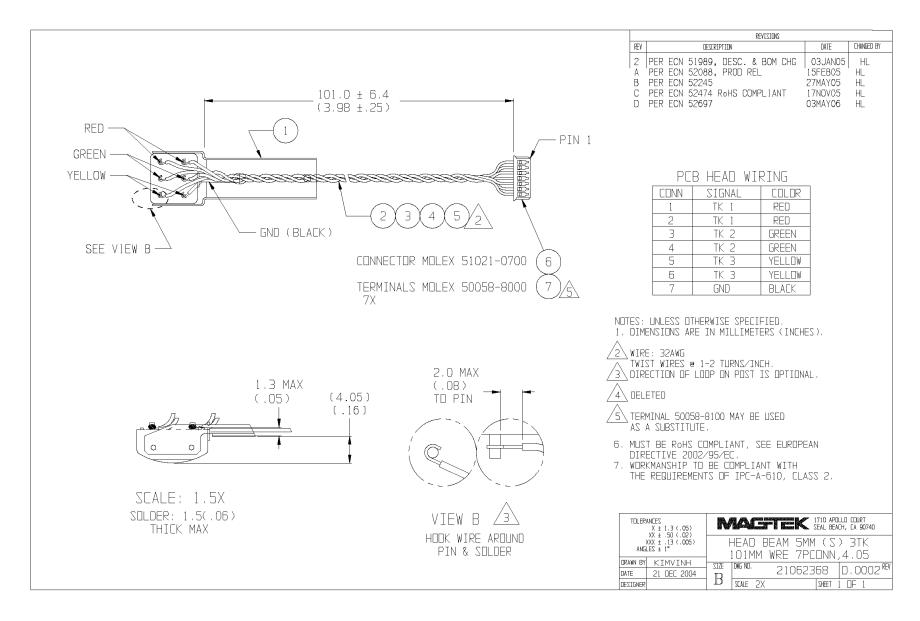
3-Track Read Head on Beam Assembly with Cable and 7-Pin Connector
